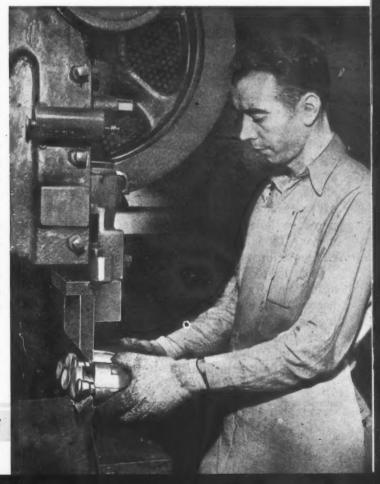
After the Sprues and Runners have been Sheared off, the Remaining Sprue is Removed on a Rotary Milling Machine to Insure a Flat Surface
